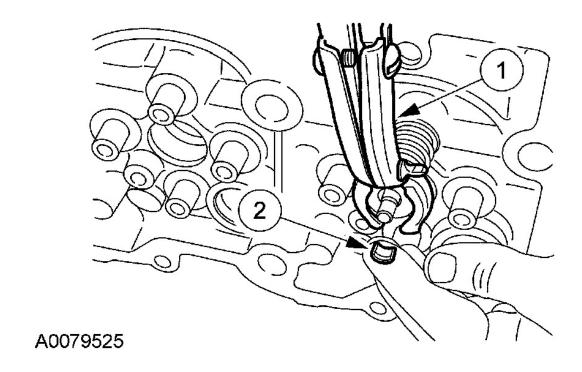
Installing Valve Spring Retainer Keys Courtesy of FORD MOTOR CO.
